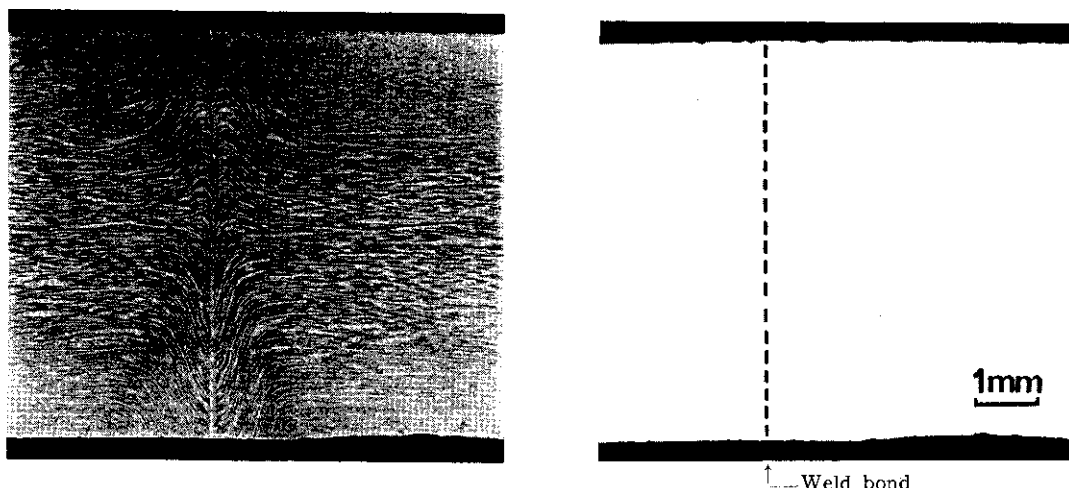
Welded zone of ERW pipe free from non-metallic inclusion; the hot coils for making this pipe was manufactured from a continuously cast slab (Steel: API 5LX X42)
